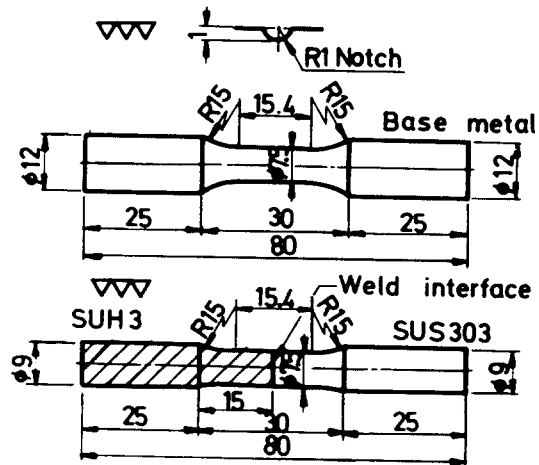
Shapes and dimensions of rotary bending fatigue test specimens.
